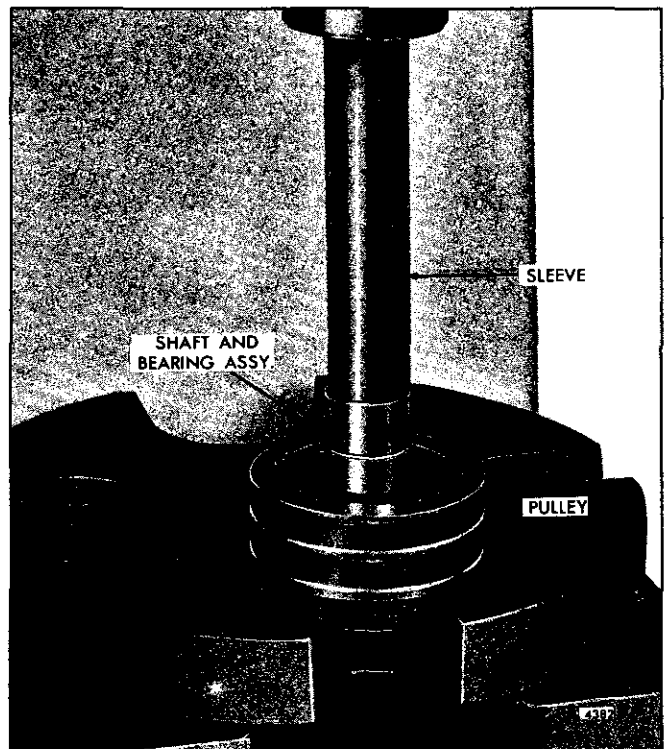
Installing Shaft and Bearing Assembly in Idler Pulley
